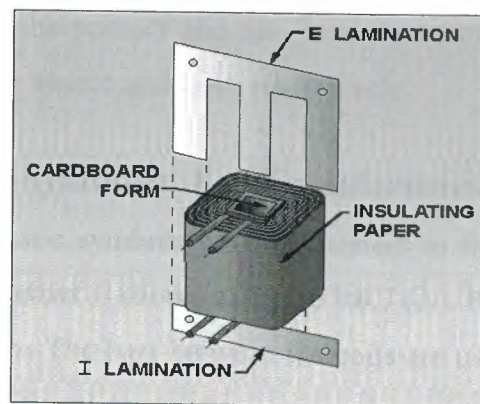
Exploded view of shell-type transformer construction.
